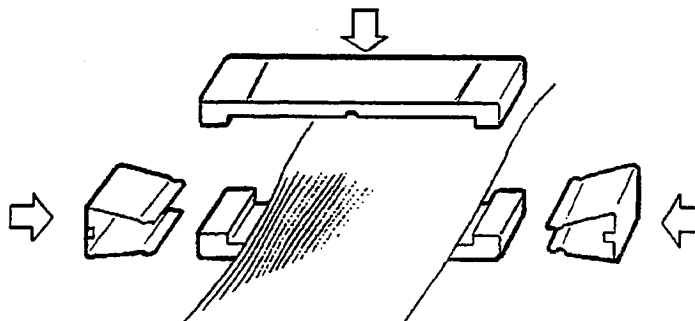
Ferrite Core Installation to MMC-F-11 KTU Ribbon Cable
